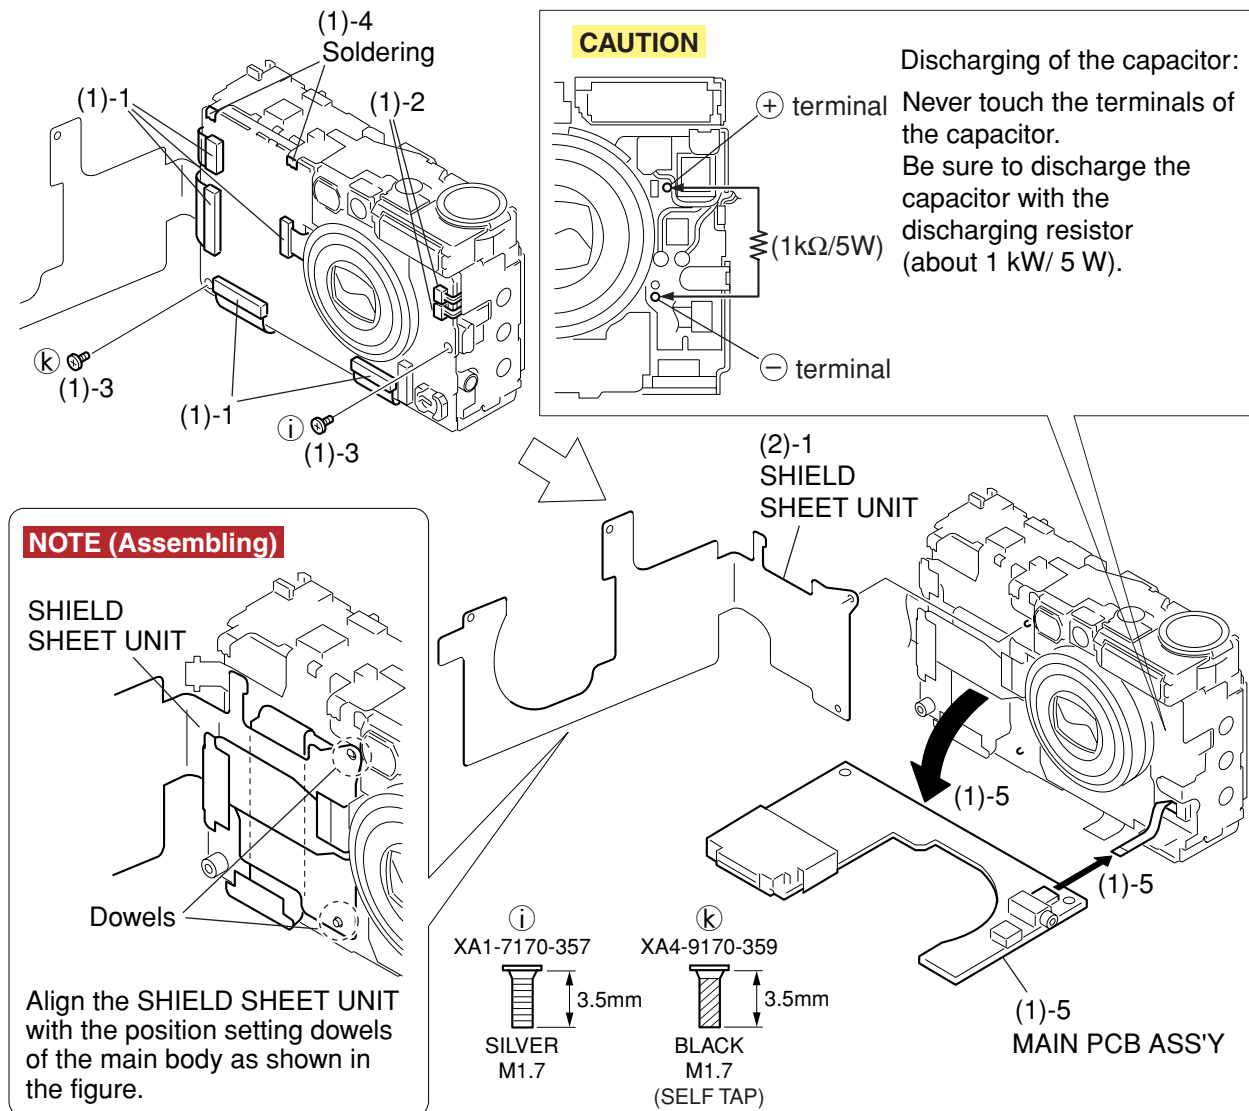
MAIN PCB ASS'Y, SHIELD SHEET UNIT
